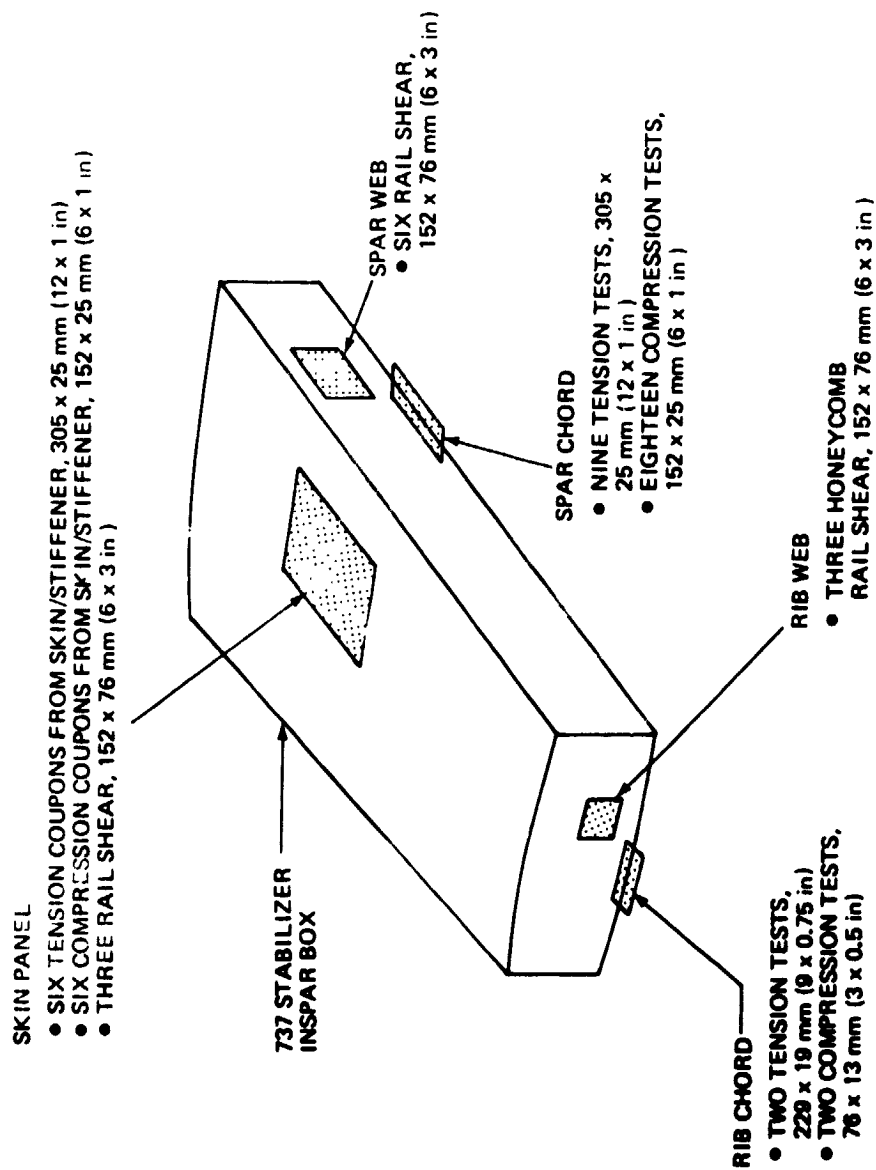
Stabilizer Subcomponent Test Plan (Concl)
